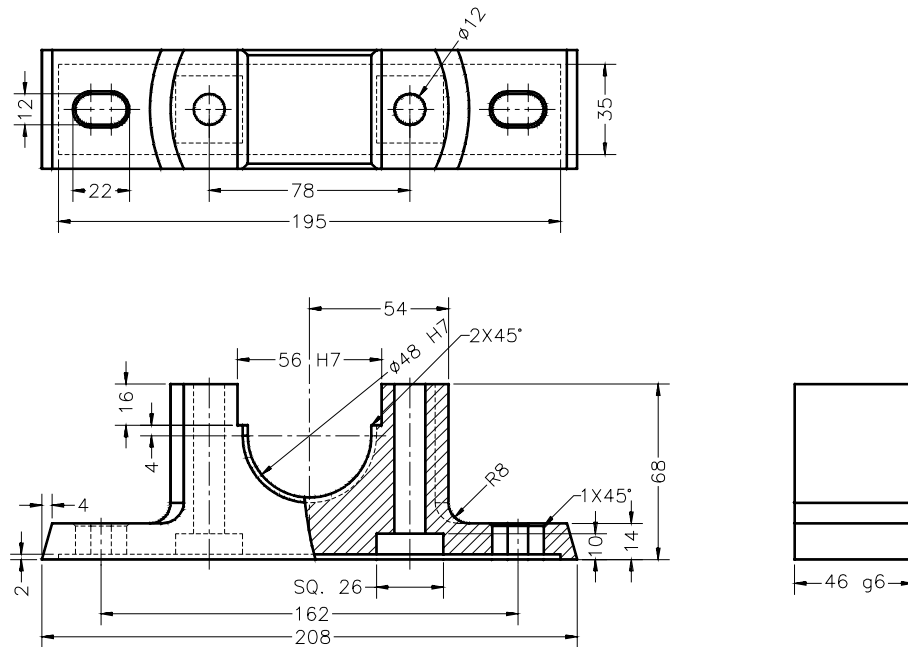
Top view, Front broken-out section view, and Side view with dimensions
